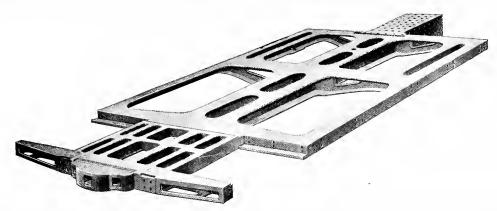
Commonwealth Steel Company's Combined Cast Steel Platform and Double Body Bolster for Vestibuled Steel Cars.
